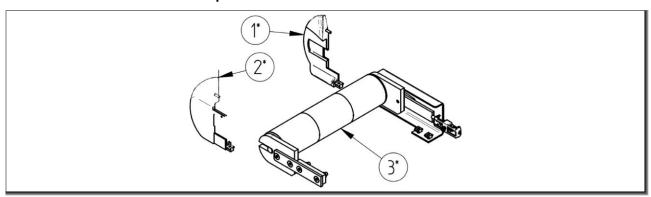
Parts list: Drum motor - position of drive unit 23 - ZZ.900.0152.00
